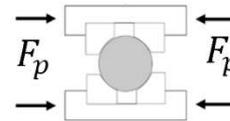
Bearing cross section under preload  $F_p$  with loaded bearing rings
